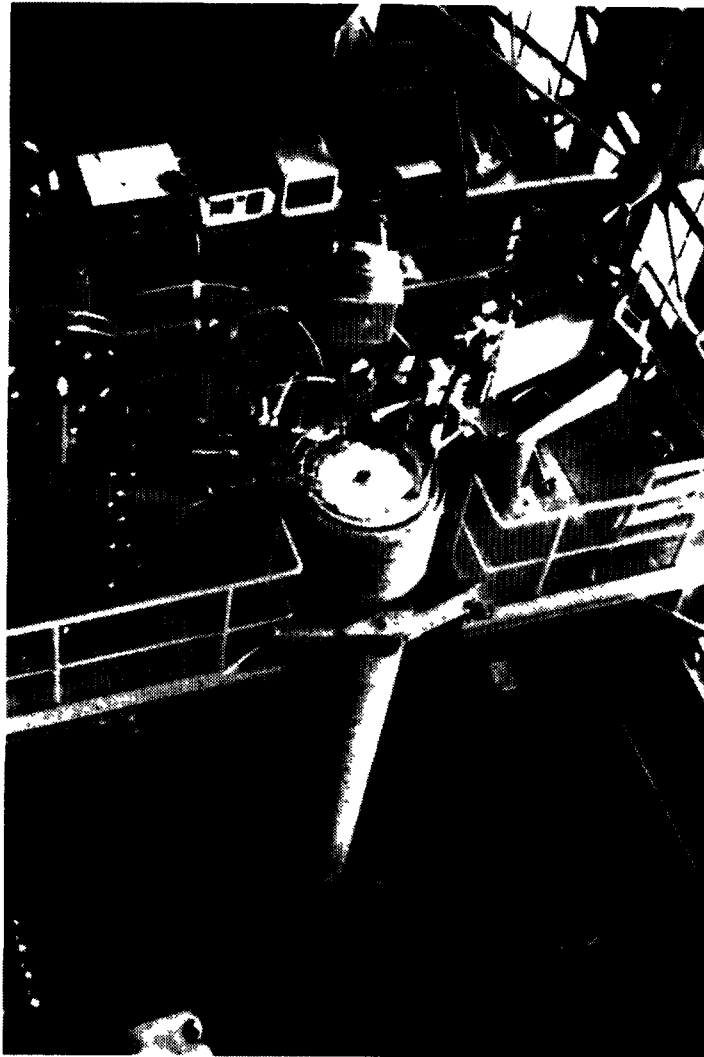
Pollux: closing final disposal cask welding of secondary lid.
